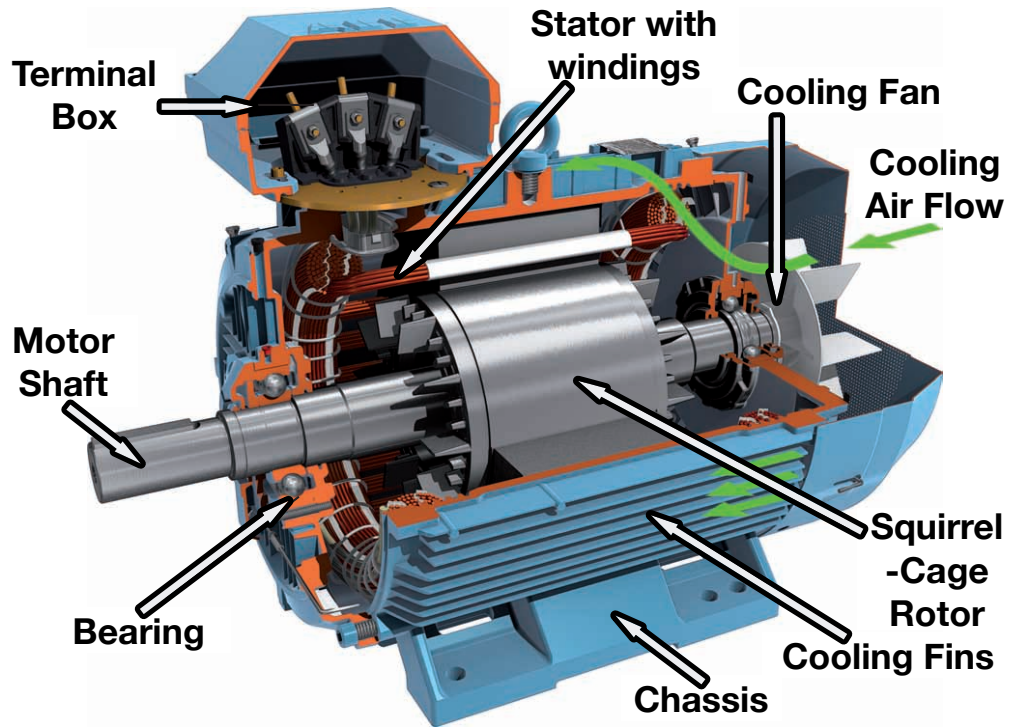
AC Induction squirrel-cage motor - cutaway.
